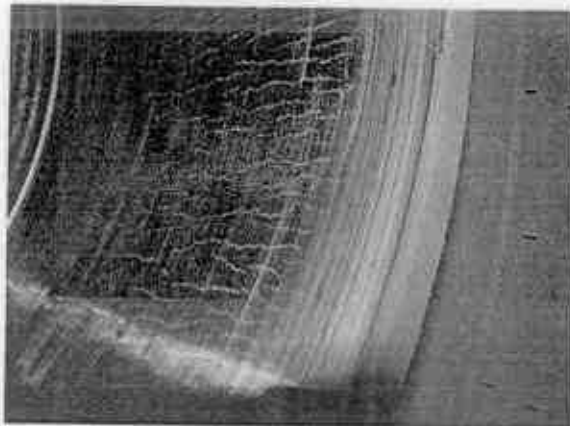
Cracks and excessive wear evident on the rear brake drum.
